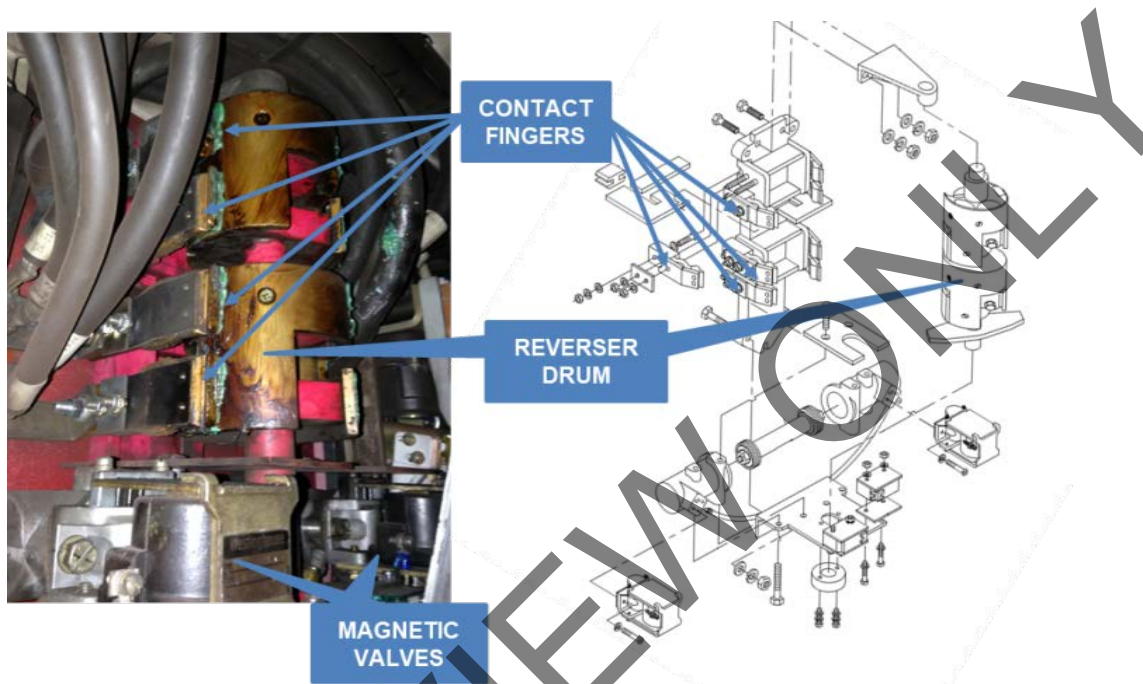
Reverser Components, Photo and Drawing –courtesy BART
